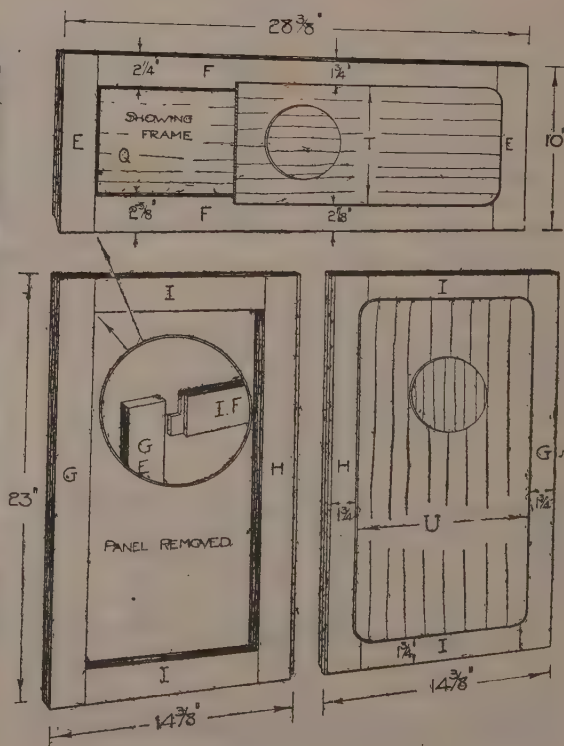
CONSTRUCTION OF DOORS AND FLAP.
